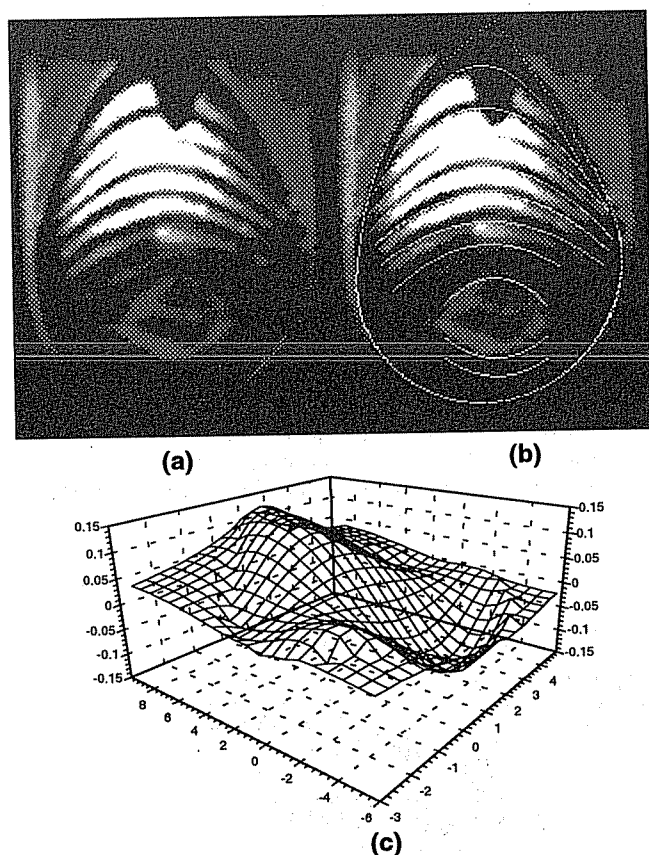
An example of sensing of weld pool surface: (a) acquired original image, (b) processed image, (c) resultant surface of weld pool
